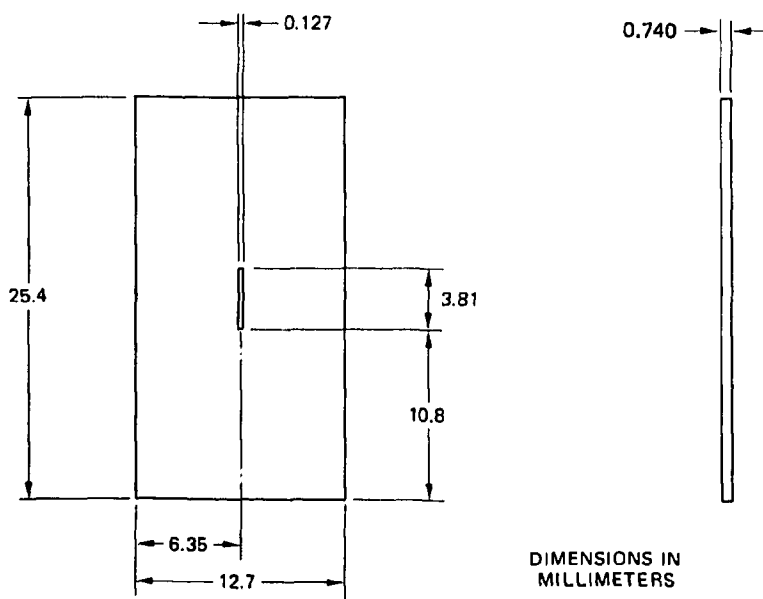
Crack-growth specimen; tabs are welded along the 25.4-mm edge following irradiation.
